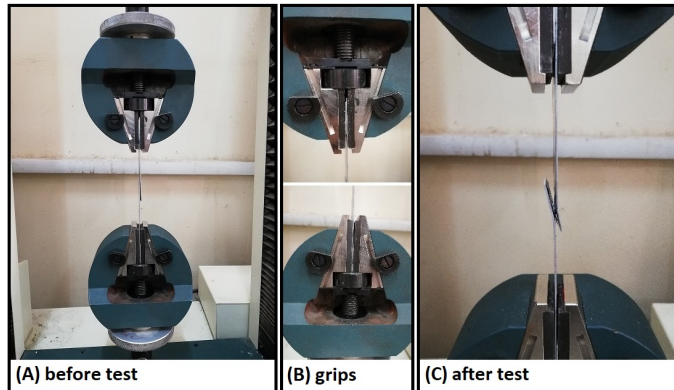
The tensile-shear test of the spot welded specimen
